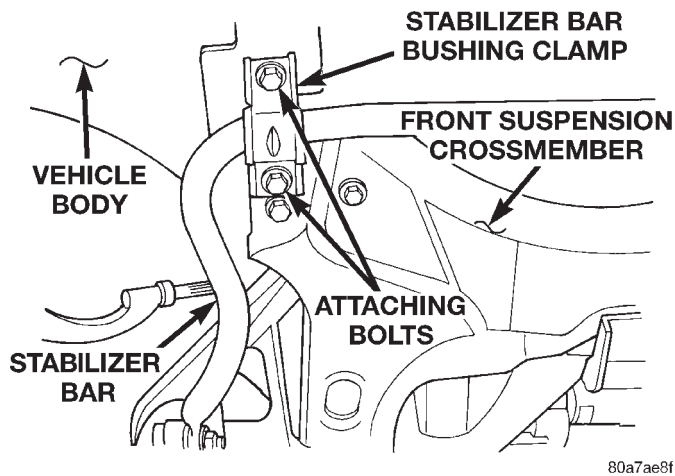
Stabilizer Bar Bushing Retainer Attaching Bolts
